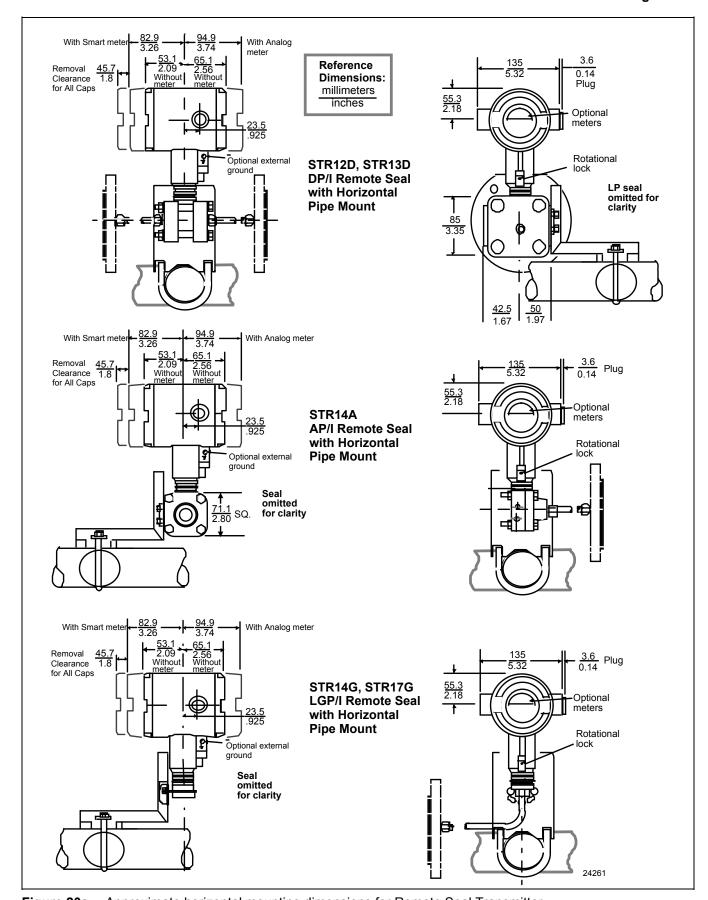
Approximate horizontal mounting dimensions for Remote Seal Transmitter.
